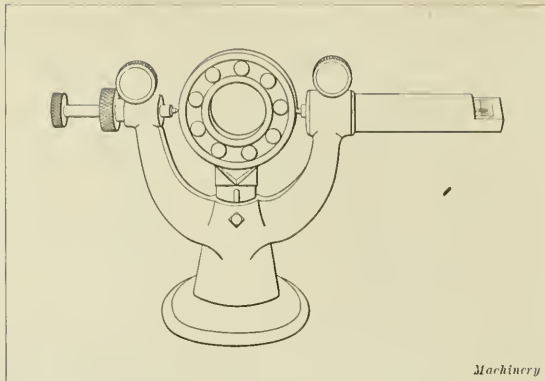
Special Type of Three-point Gage using Hirth Minimimeter for testing Roundness and Diameter of Assembled Ball Bearing
